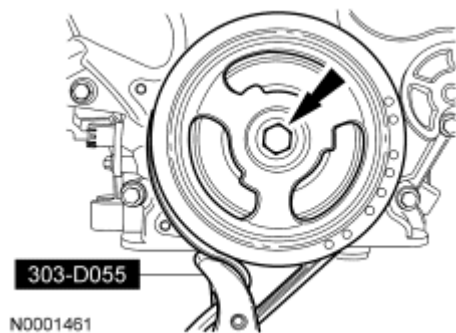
Identifying Crankshaft Pulley Bolt & Special Tools
